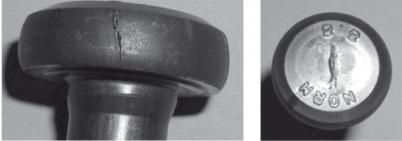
Cracks in forging. Courtesy: NORM Fasteners Co.
